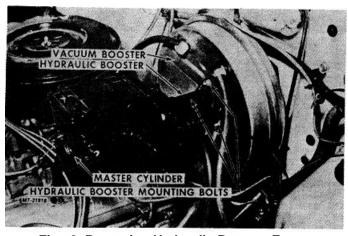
Removing Hydraulic Booster From Vacuum Booster
